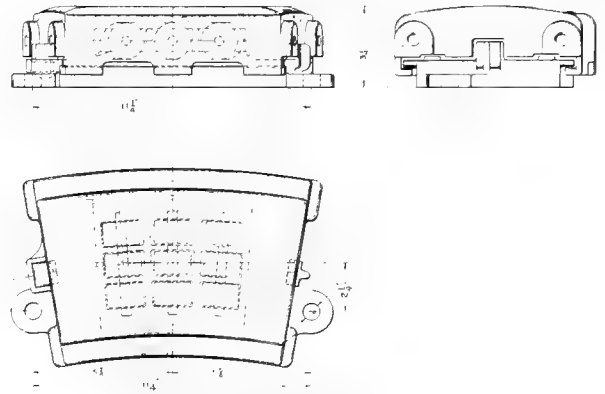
Creco Covered Roller Side Bearing for Four-Wheel Passenger Train Car Trucks.
